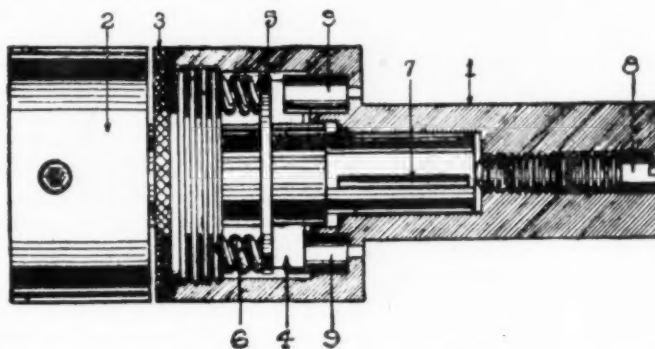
SECTIONAL VIEW OF IDEAL RELEASING TAP AND DIE-HOLDER.
